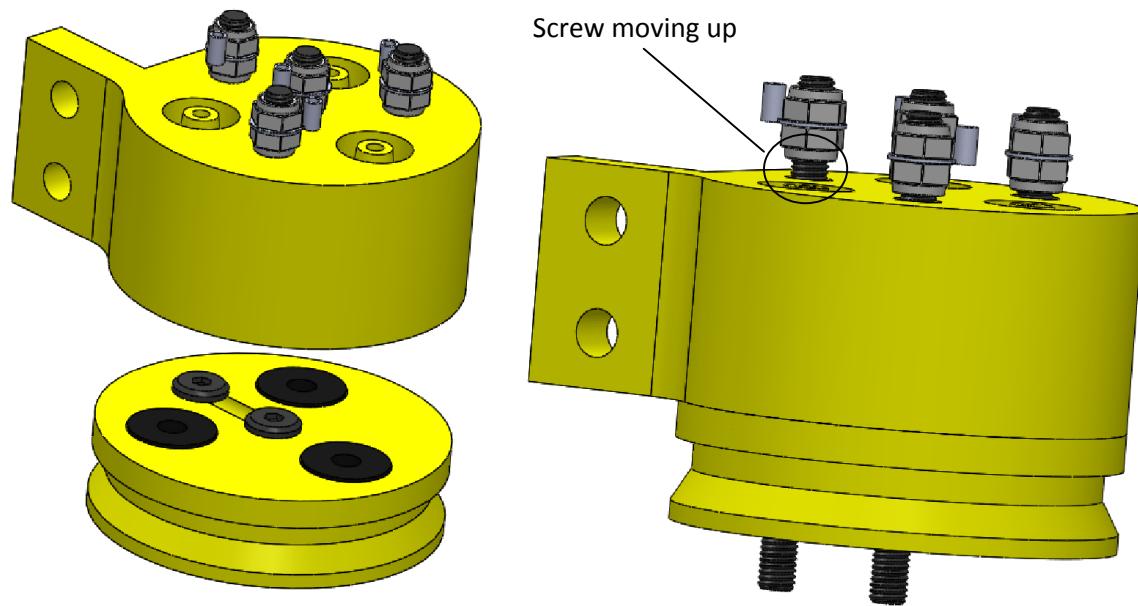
Solidworks renderings showing the magnetic interaction between the tool mount and tool base.
